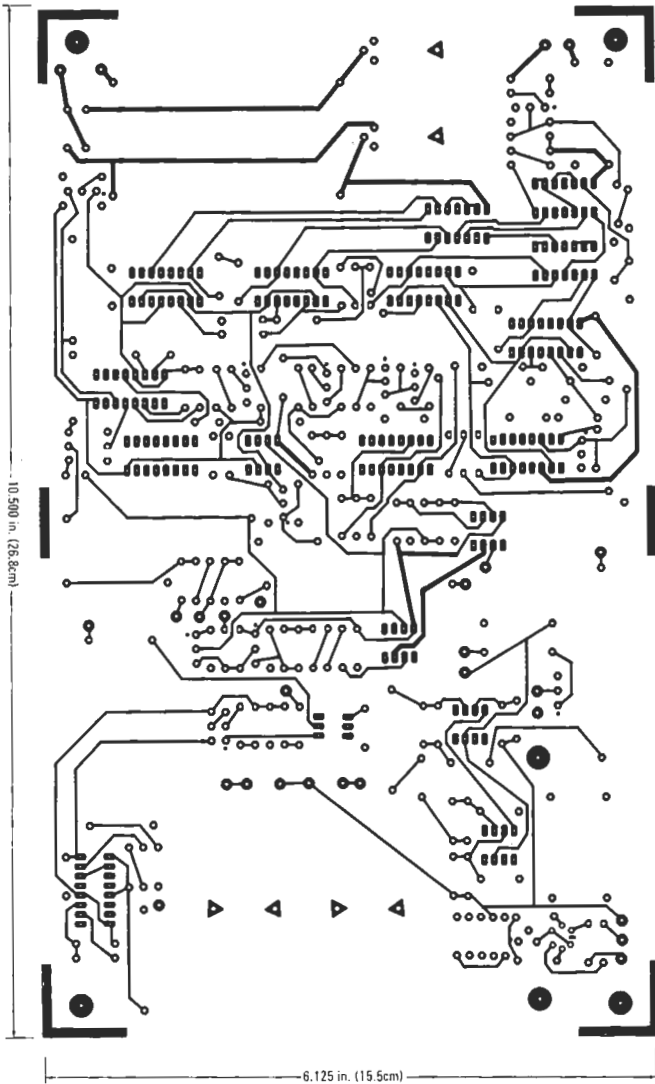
MINDPOWER: ALPHA PRINTED-CIRCUIT BOARD foil pattern of the bottom of the double-sided board shown half-size.
